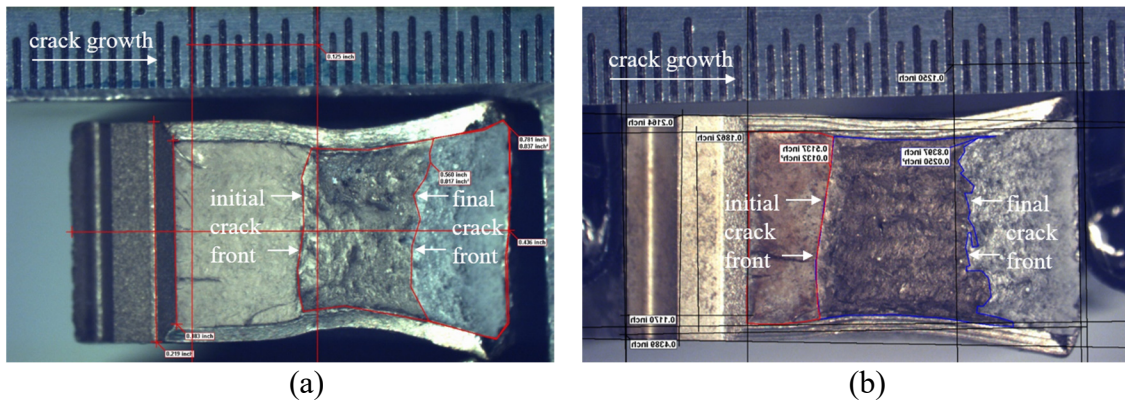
The fracture surfaces of the (a) LS-2 specimen and (b) LS-4 specimen.
